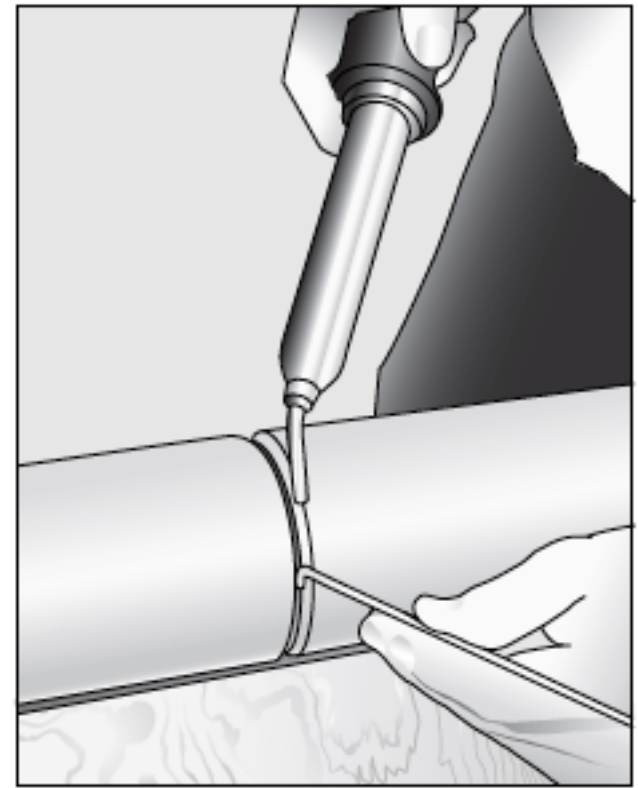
Using a hot-gas torch to make a weld in plastic pipe.
